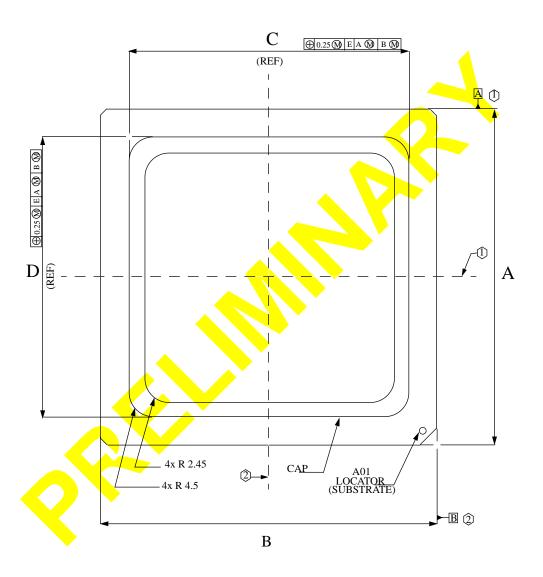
Drawings and Dimensions of the PID9t-604e BGA package
